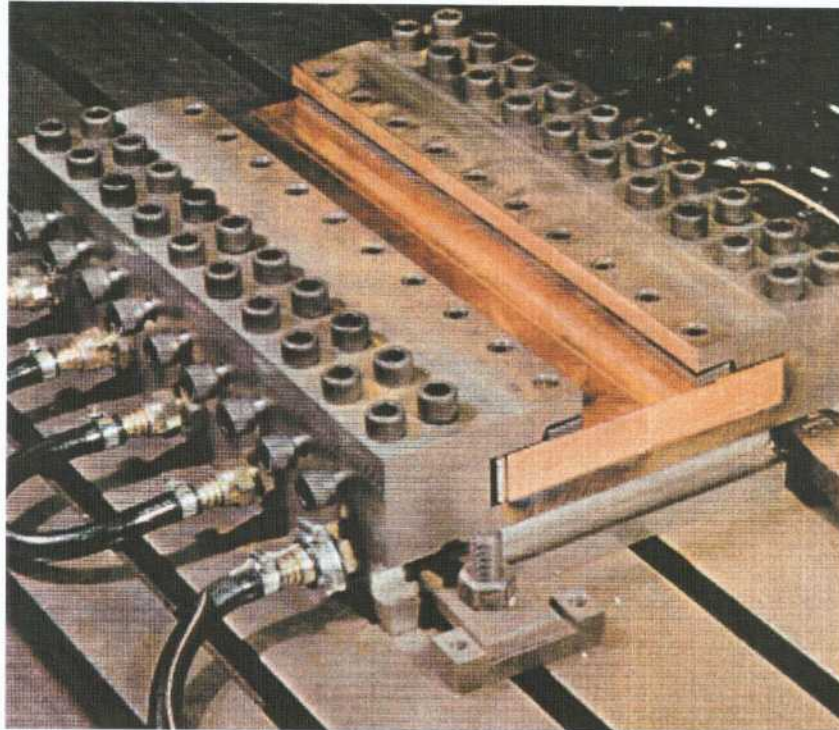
Water-cooled fixture for joining of copper plates with FSW technique.
